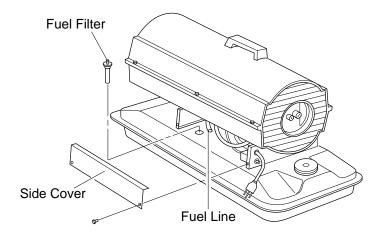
Fuel Filter Removal, 30/70,000 BTU/Hr Models
